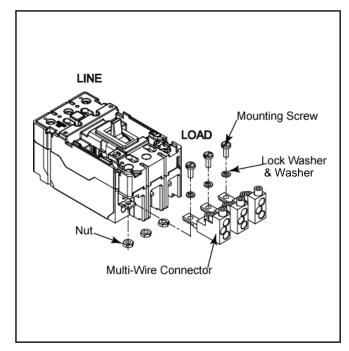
Mulit-Wire Connector Kit Installation Layout
